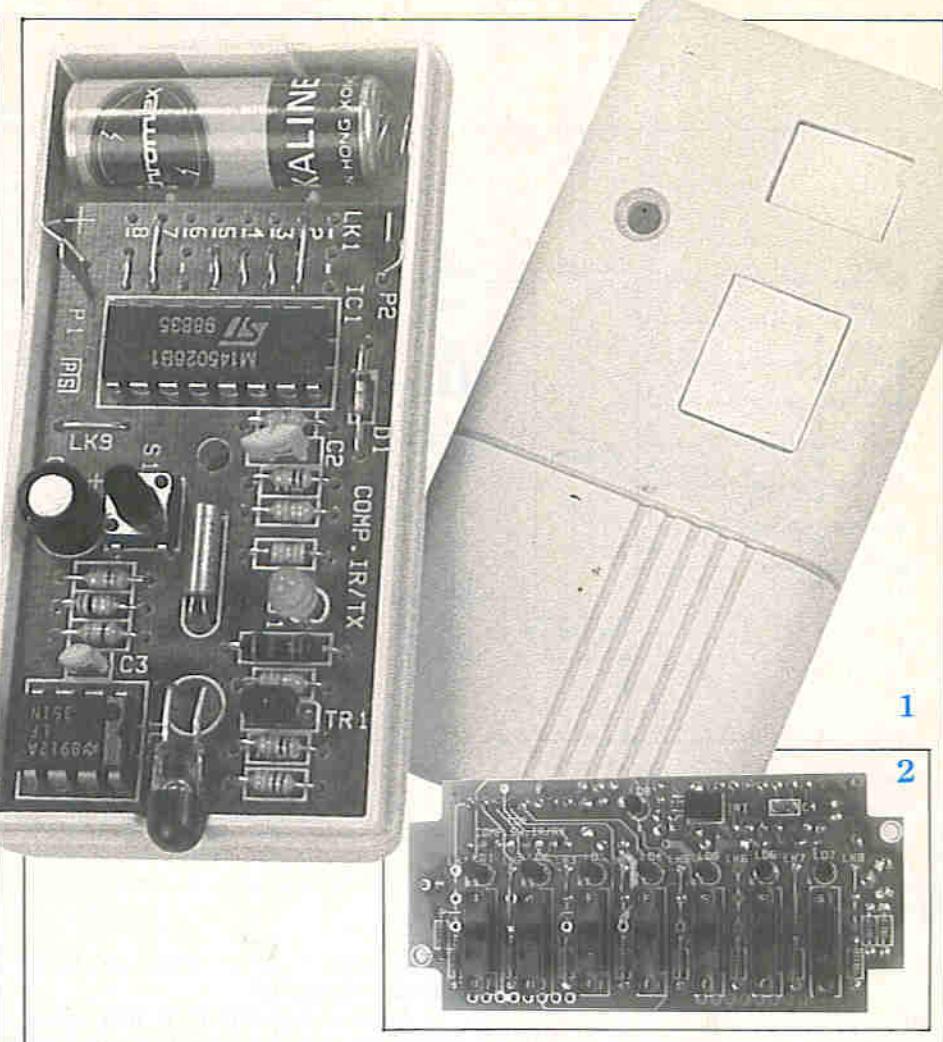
The Infra-red Transmitter Unit with PCB and Battery installed, prior to final assembly of the case. Inset: Photo 2. The assembled Infra-red Receiver and Switch Unit PCB.
